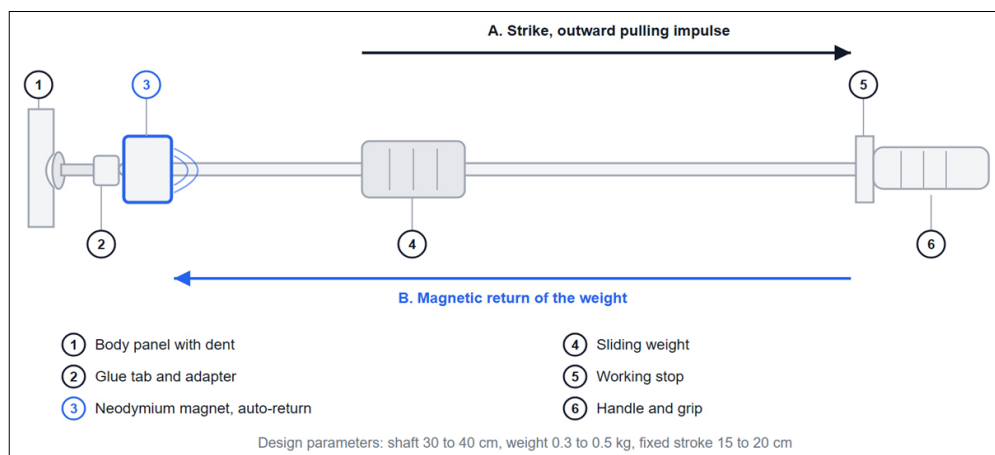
Reverse hammer with a magnetic-return mechanism.
